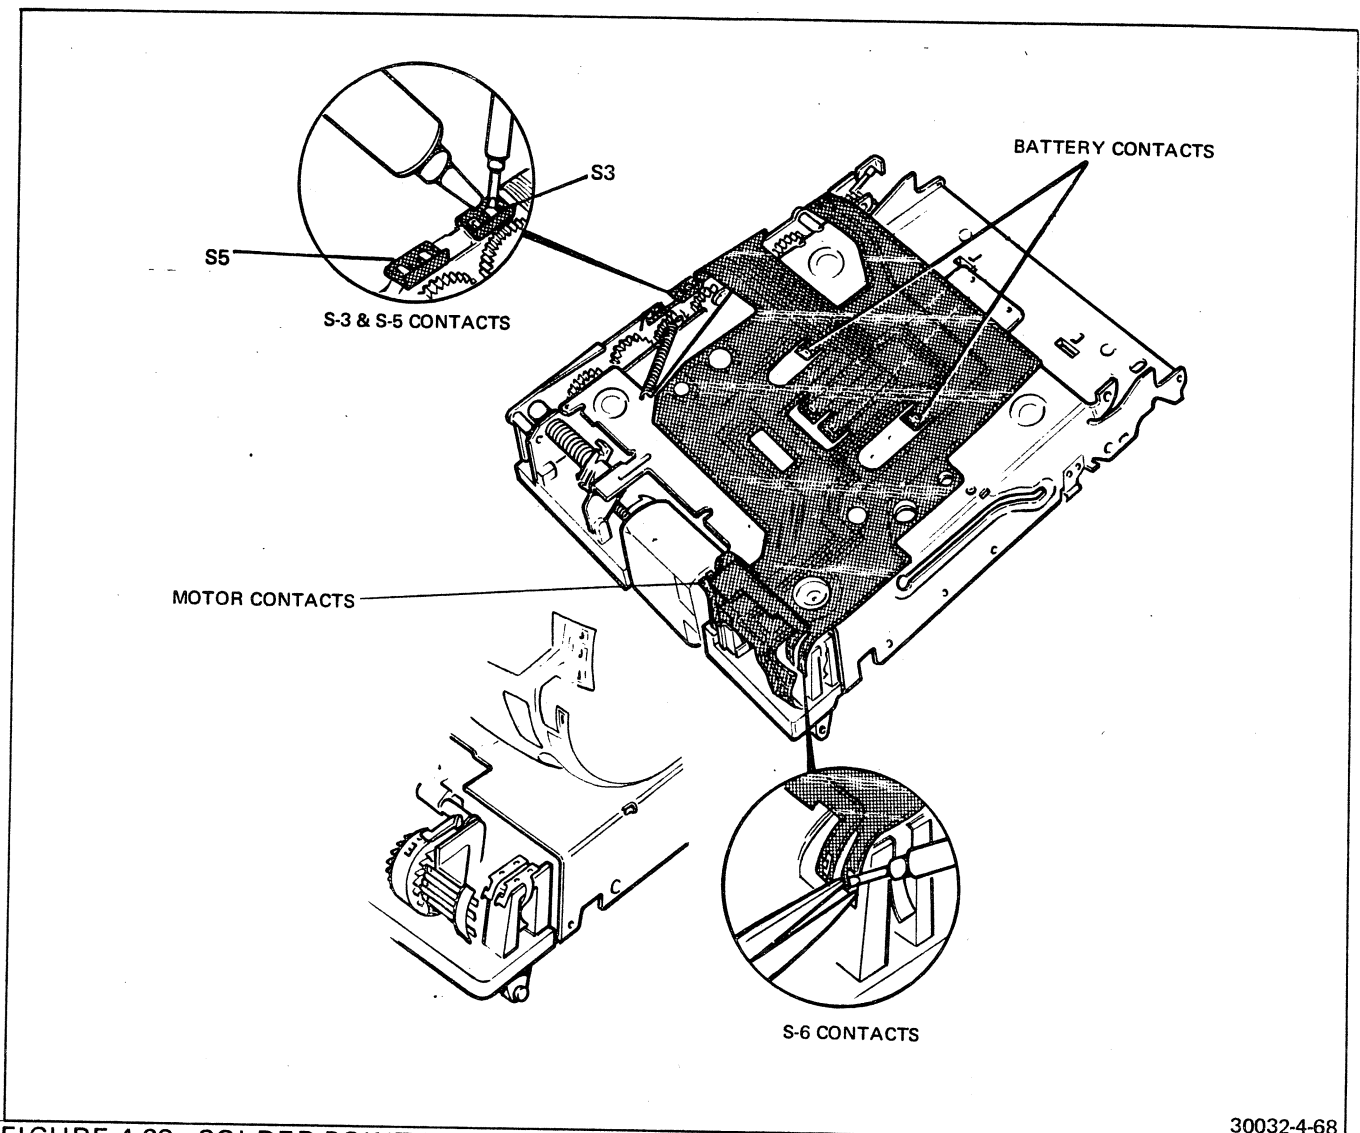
SOLDER POINT IDENTIFICATION
